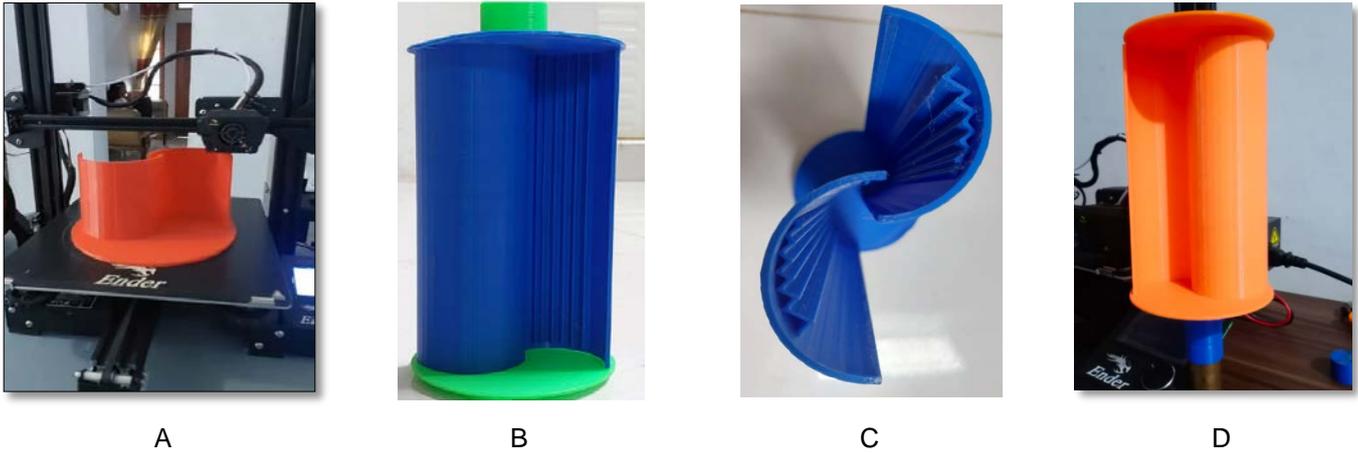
(a) The process of printing models (b) (Front view of model I (c) Top View of Model I (d) Model II
